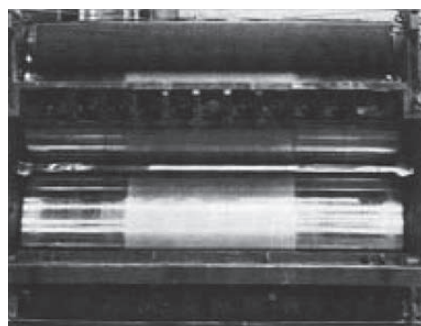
Roll coating formed in a lab mill⁹⁾.
